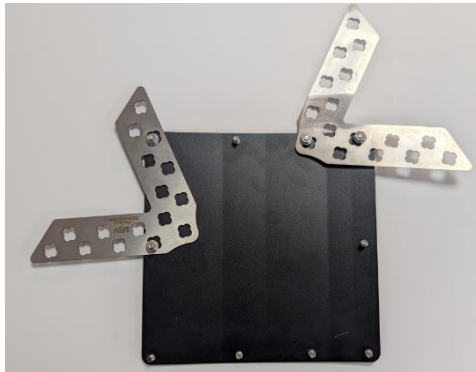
EP-77-F (Berlingo 19> Side Door)
